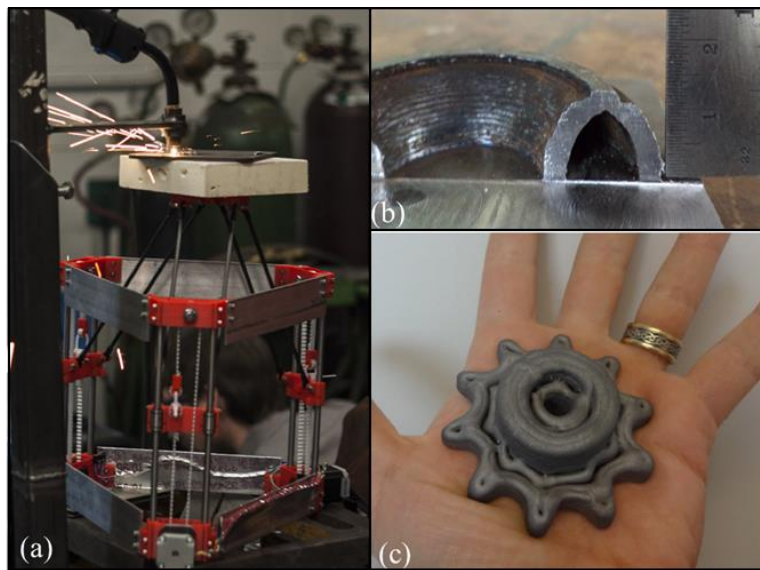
(a) A wire-based arch welding 3D printer in action [4] (b) Ducts with curved cross-section 3D printed using arch welding 3D printer [5] (c) A customized sprocket 3D printed using arch welding 3D printer [4]
